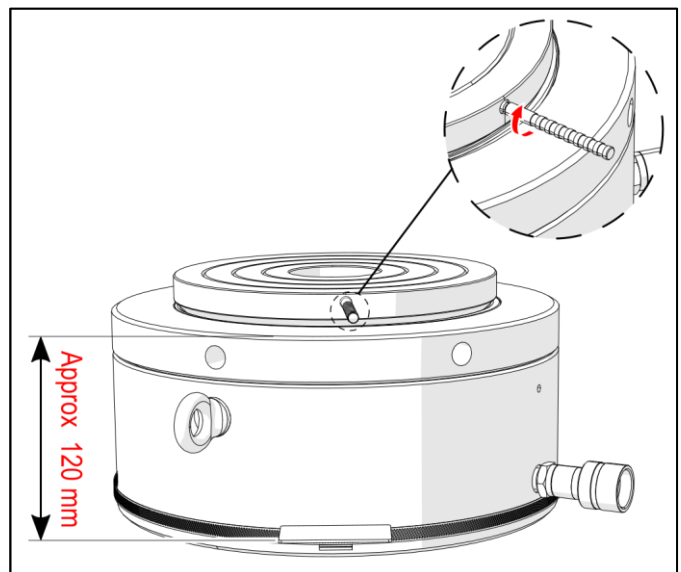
Mounting Kit Saddle Bar Installation & approx. Base Plate Position
